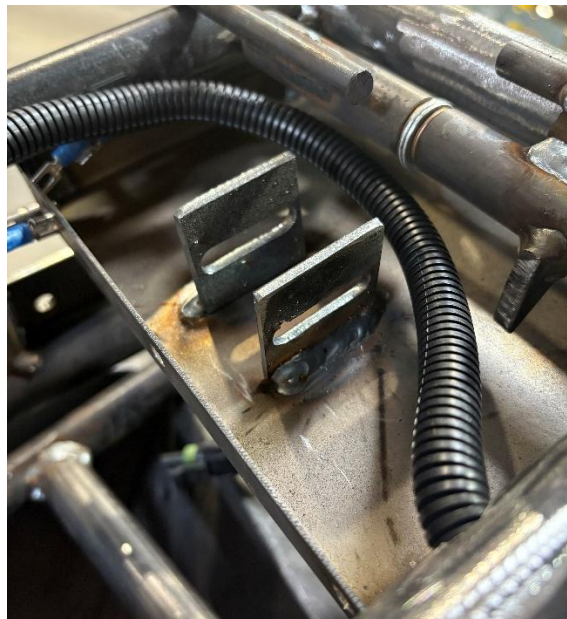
Clutch Switch Adjust Plate Welds
